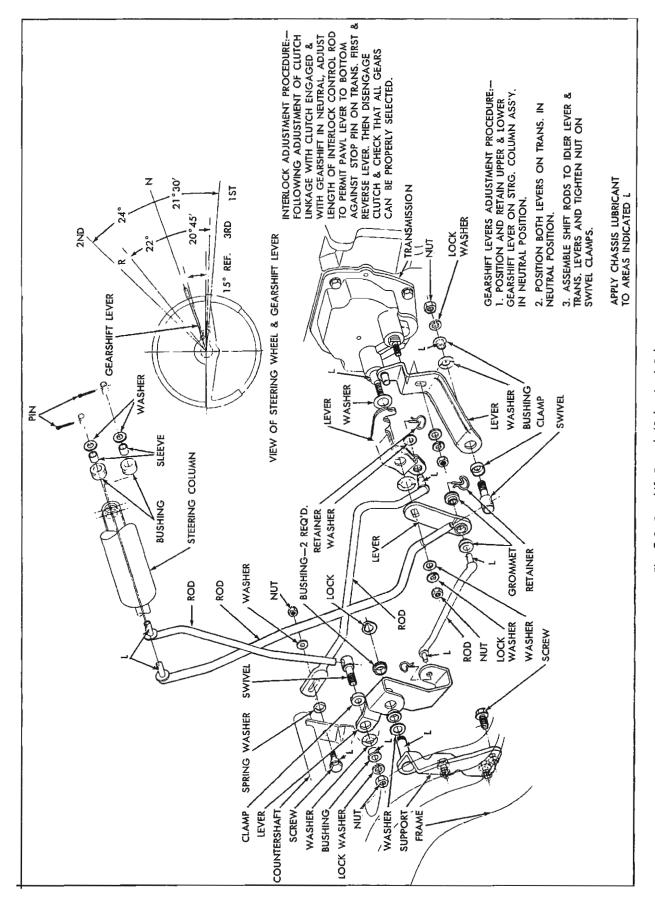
Gearshift Controls (Column) - 6 Cyl.
